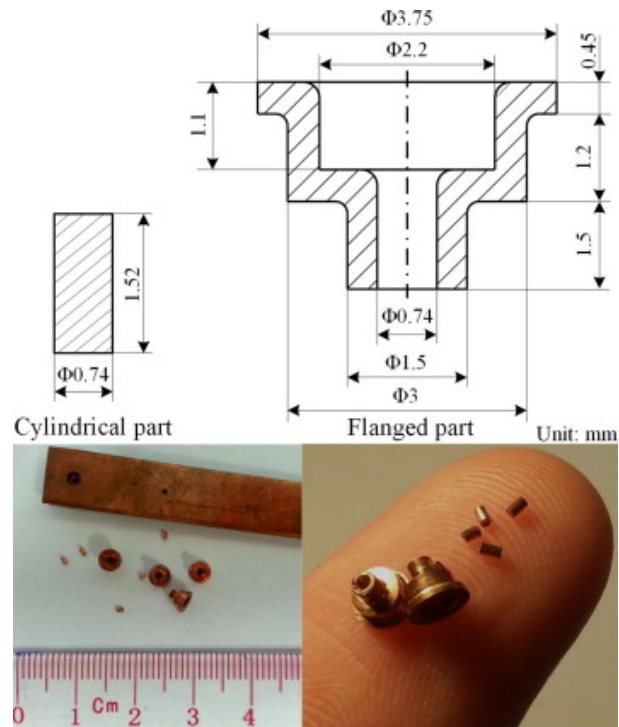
Progressively μ -formed cylinders and flanged parts [112].
